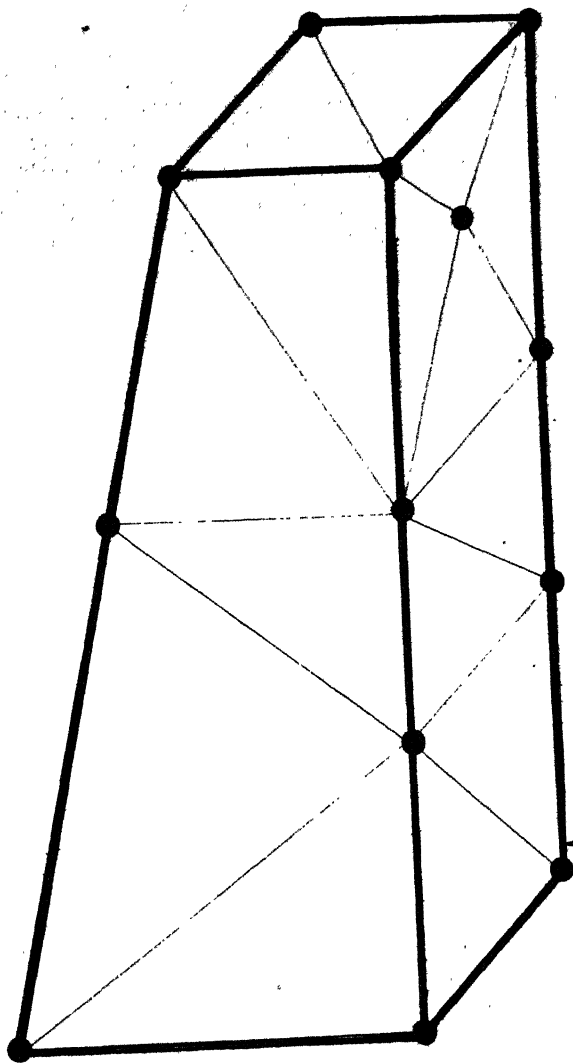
HORIZONTAL MILLING MACHINE STRUCTURE
